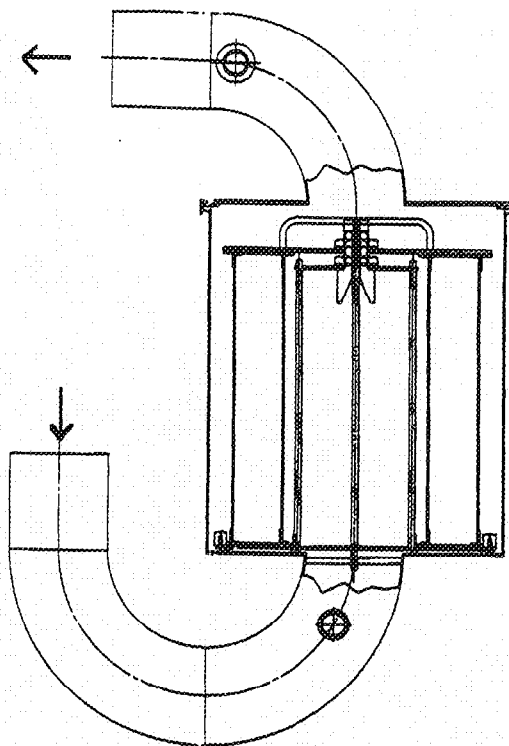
Schematic of cylindrical carbon filter cartridge mounted in a housing.
